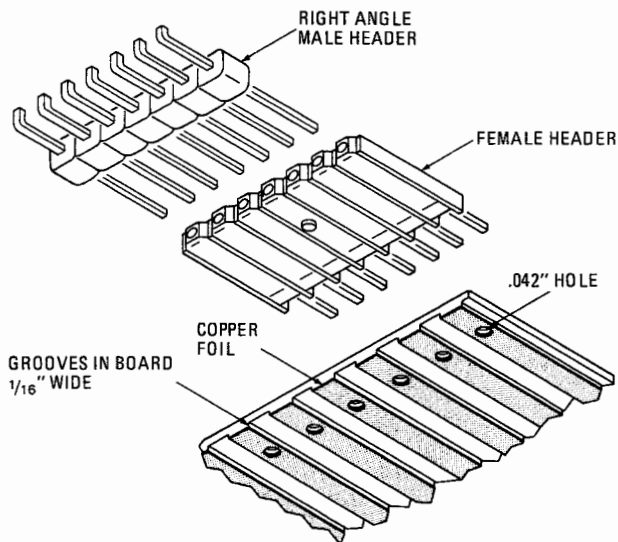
HEADERS FORM CONNECTORS as auxiliary boards are plugged into the motherboard or main-frame.
